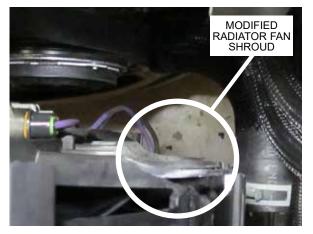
f: Grind the tube profile into ribs on radiator fan shroud
